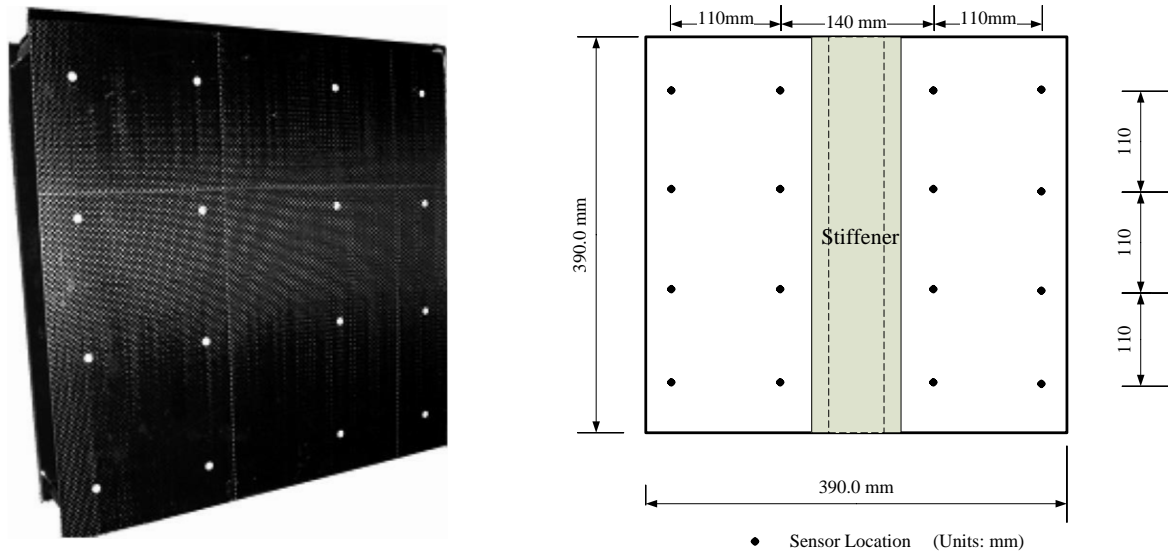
Geometry of the stiffened CFRP panel (Specimen 2) and its sensor layouts
